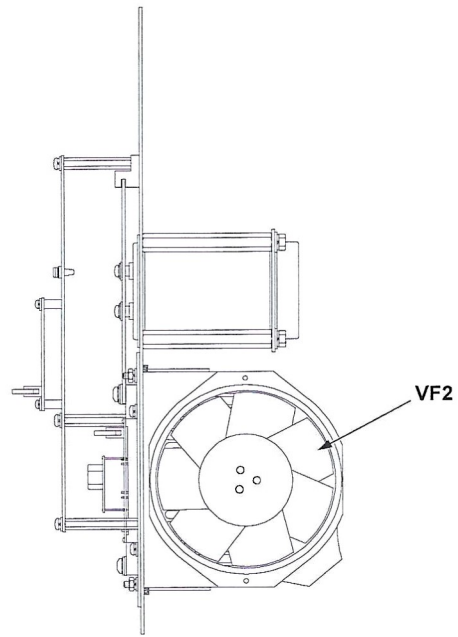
Power Module Assembly – A2, Sheet 2 of 3
